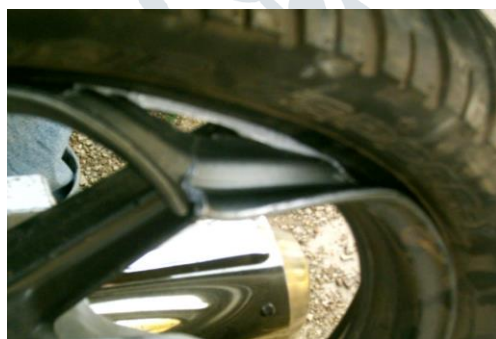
Fracture observed in the rear wheel of Karizma bike
